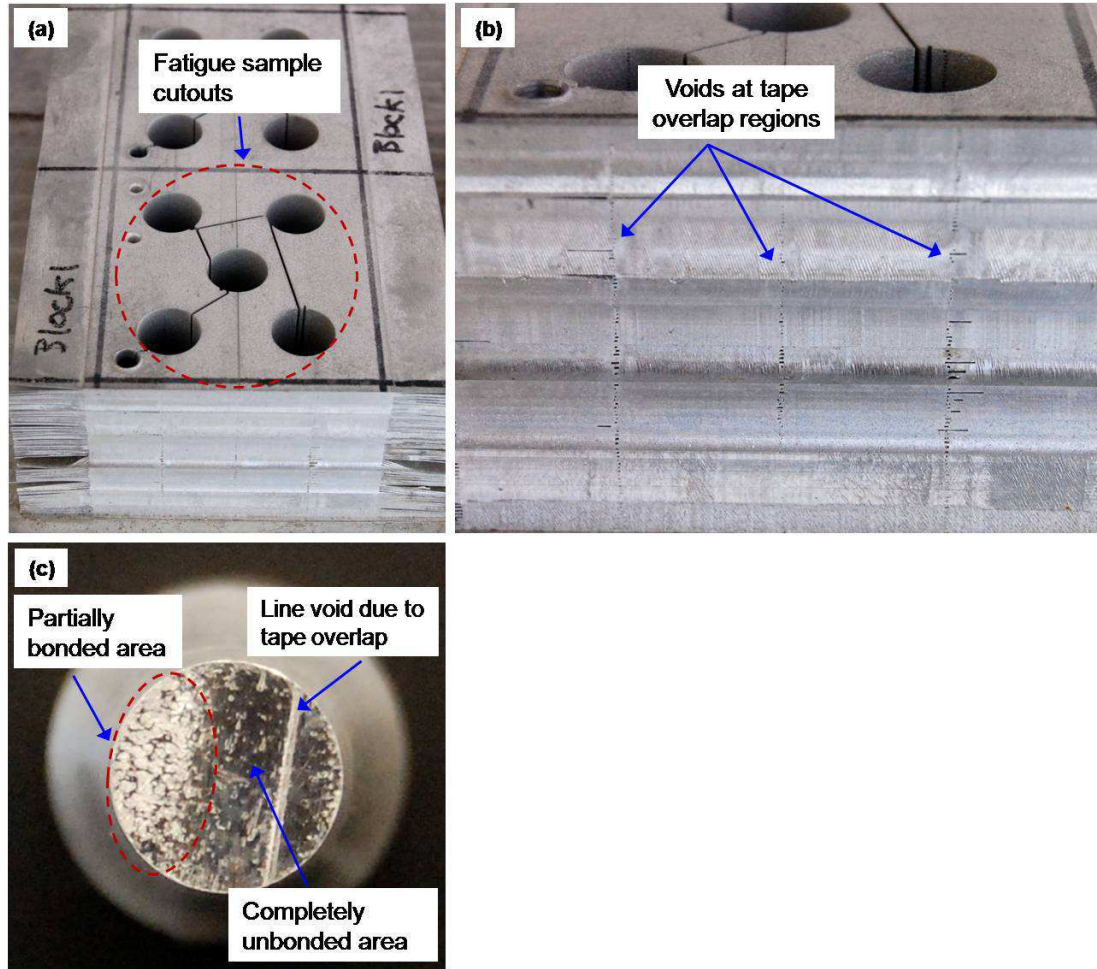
Photographs showing (a) the overall block from which fatigue samples were machined from (holes), (b) close-up of tape layer interfaces showing the voids at the overlap regions, and (c) typical fatigue sample fracture surface on macro scale.
